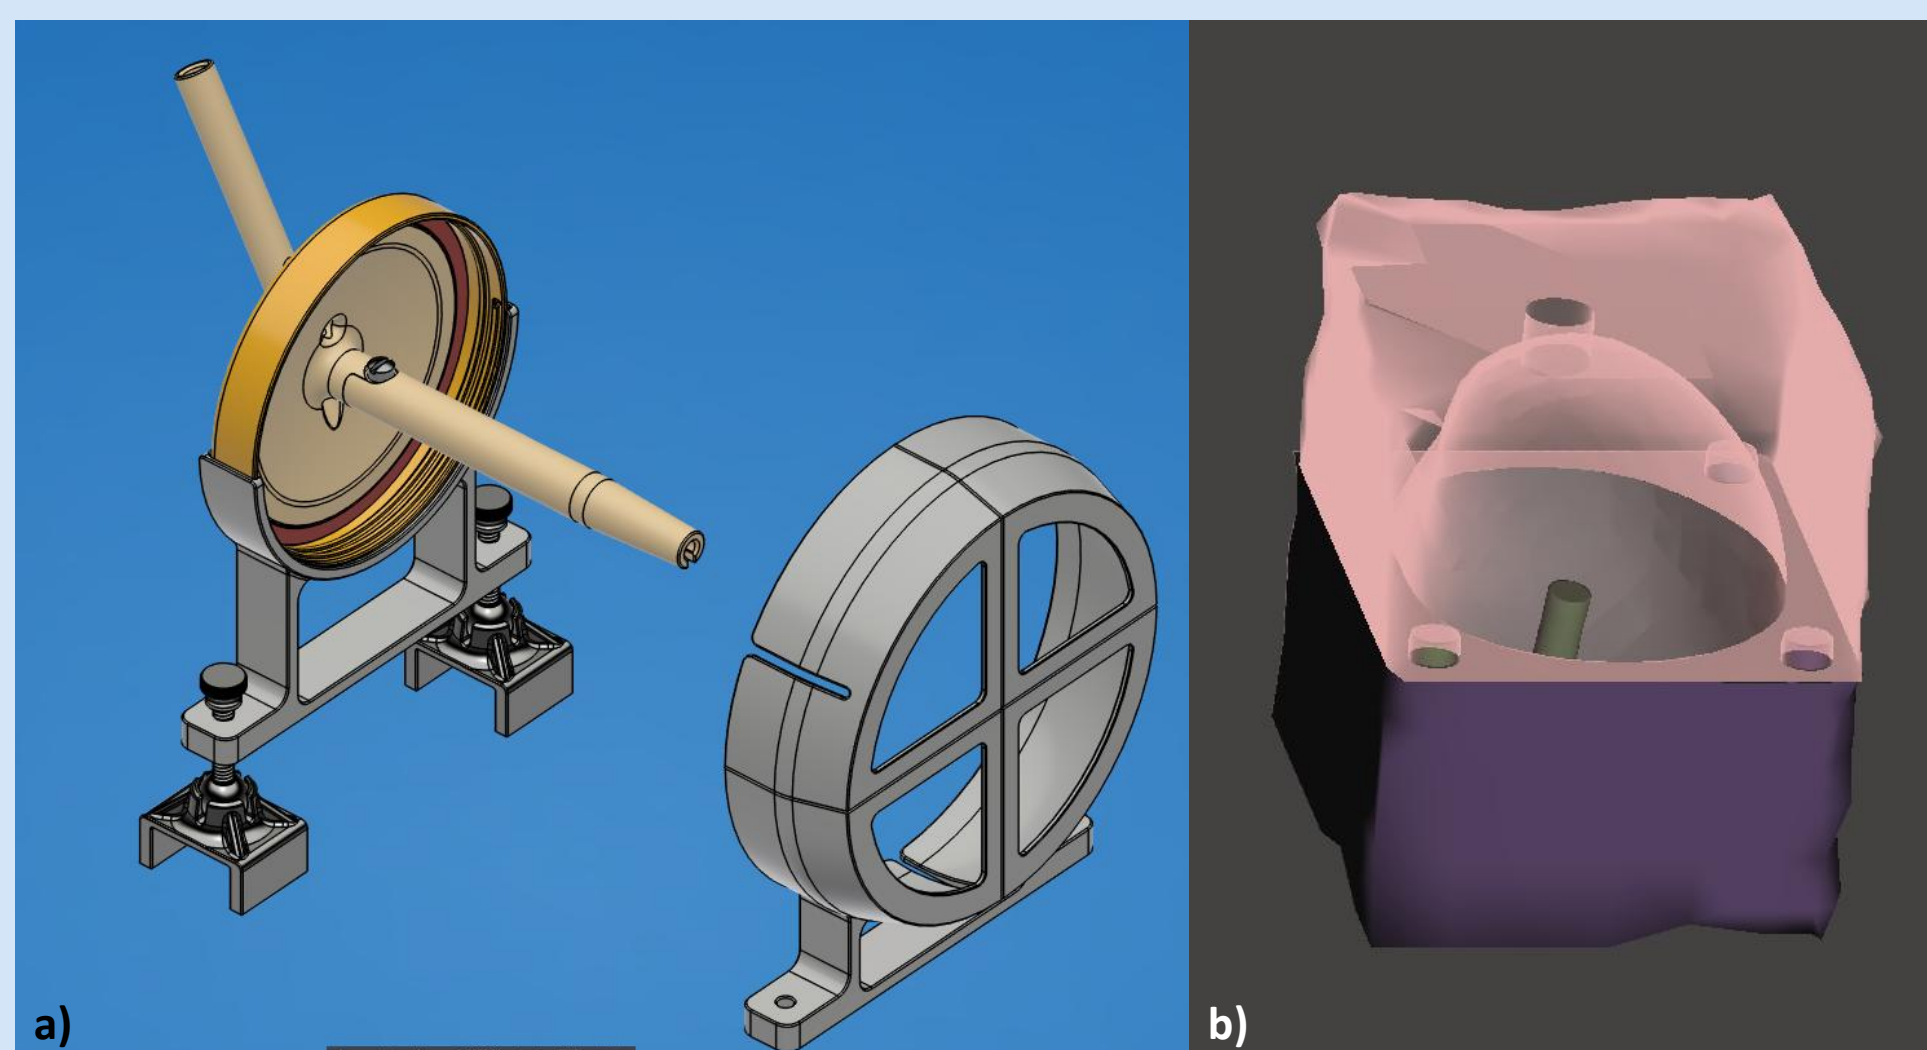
a) Support parts with the watertight PSD holder and integrated cap b) 3D design of a prostate mold. It is designed so the detector fits in its center.
